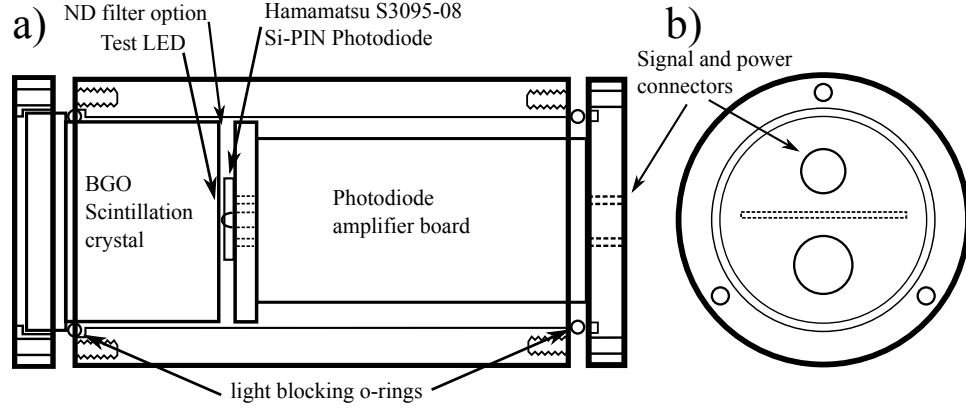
Drawing of detector assembly with a) side view and b) rear view.
